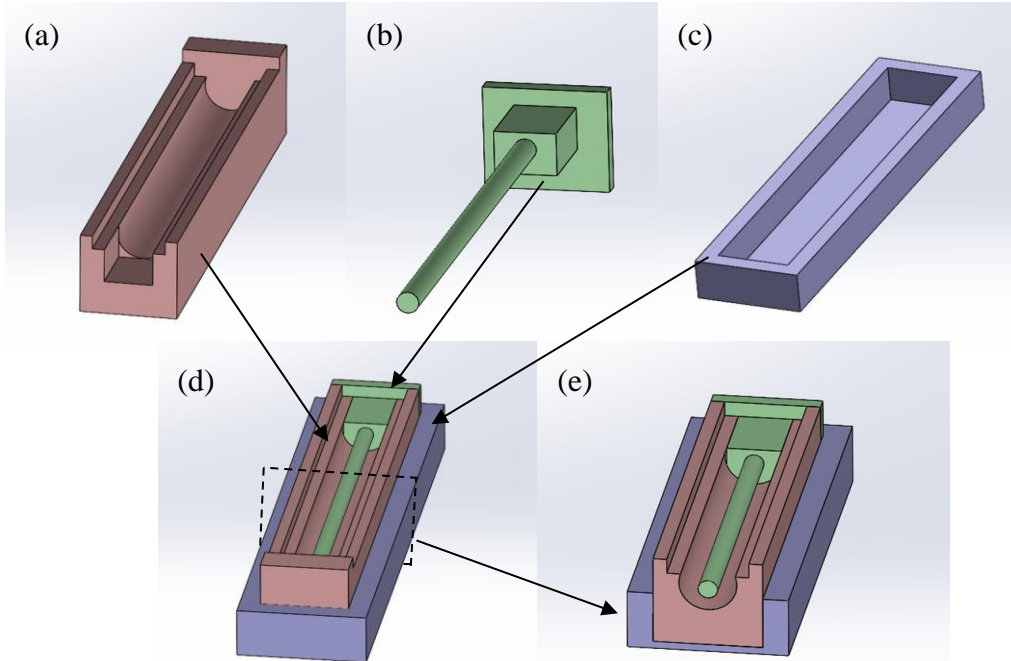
The components of the mold to cast silicone. (a) A wall with a circular opening to create the shape of the actuator chamber. (b) A rod attached to a extruded rectangle that matches the geometry of the rectangular nest in (a). (c) Box to tightly hold (a) and (b) together. (d) Assembly of all the mold components. (e) Cross-sectional view of the assembled mold, where the cavity is filled with silicone.
